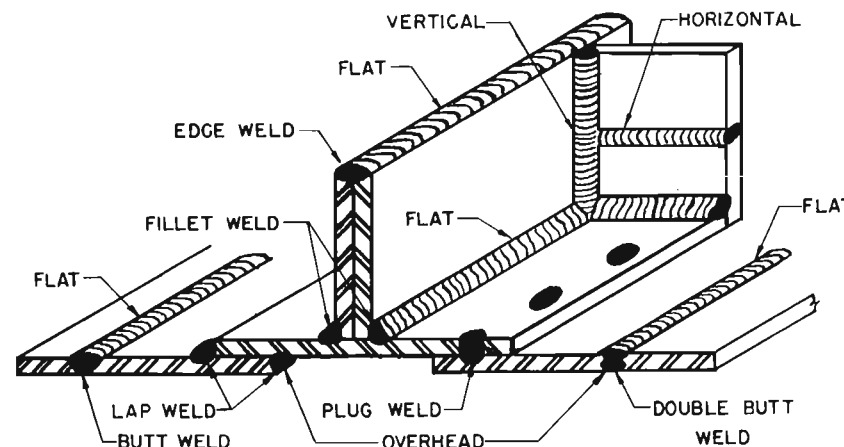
Types and positions of welds. Positions of welds are flat, horizontal, vertical, and overhead.
